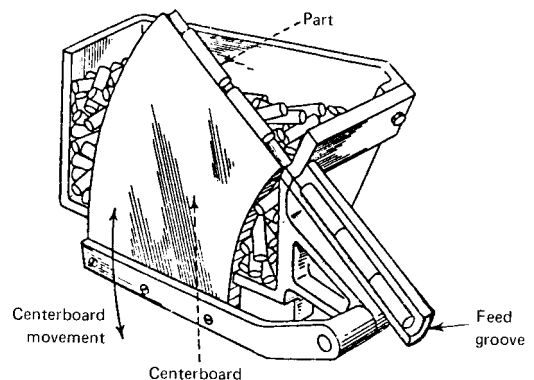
Centerboard feeder. Board, with edge shaped to match part, dips and then rises through parts to select part, which then slides into feed groove.
